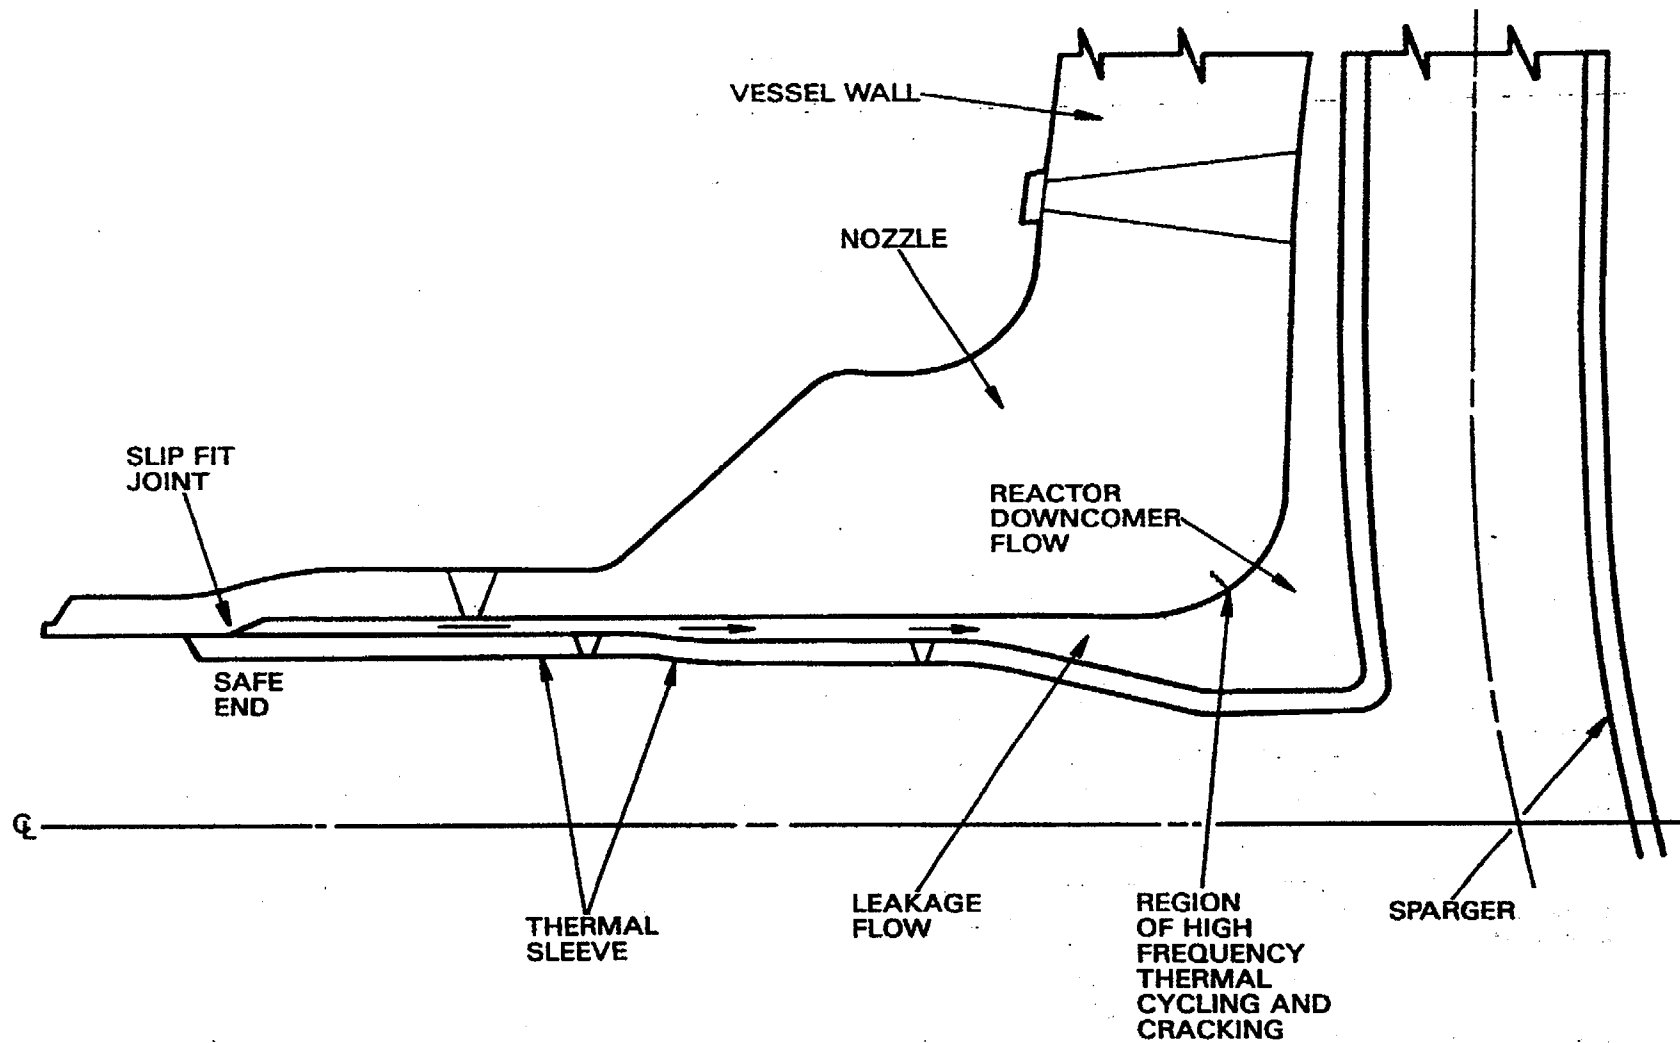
Location of Cracks in Feedwater Nozzle - Cross Section [3-7]
